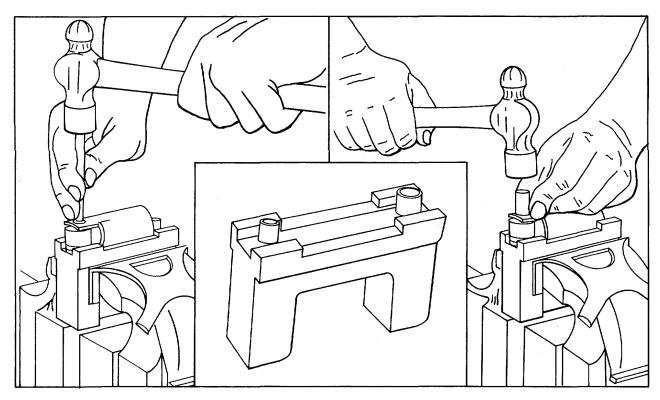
Removing or Installing Cam Follower Roller and Pin Using Tool J 5840-01
